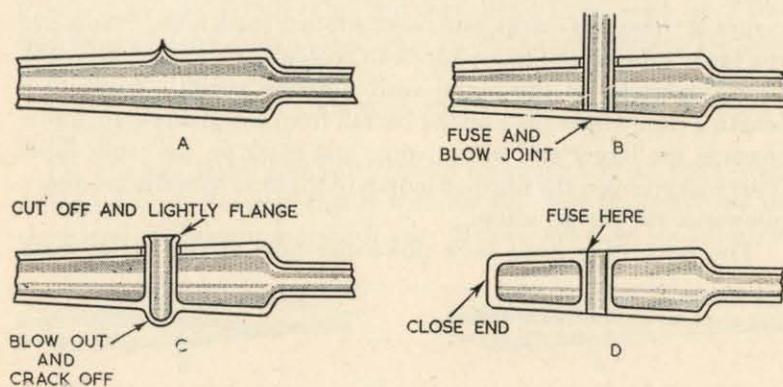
FINAL STAGES IN MAKING A STOPCOCK KEY
